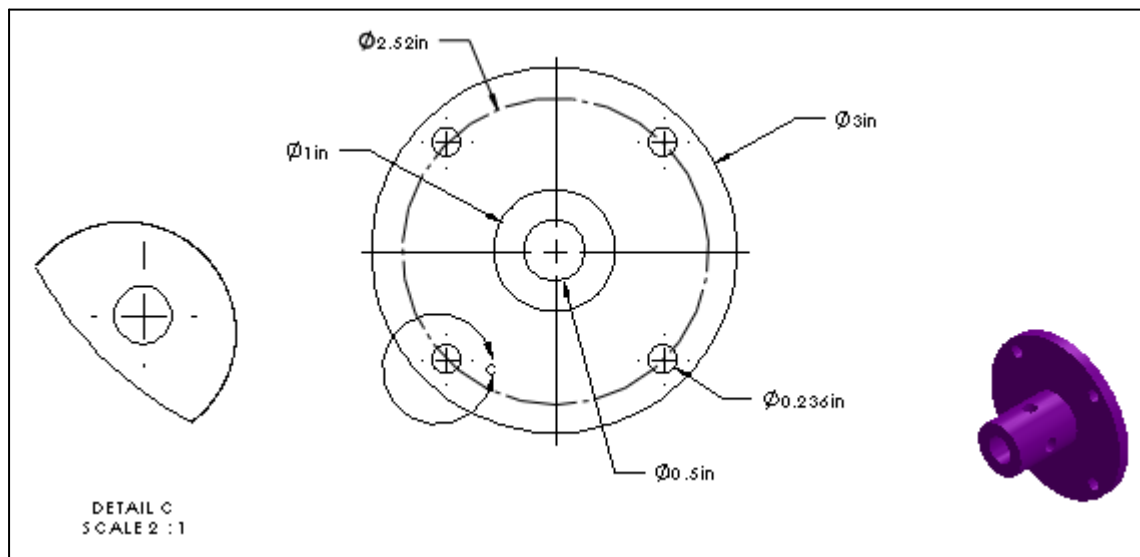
Drawing of Front View of Half Spool and Detail View of Revised Bolt Hole Diameter
